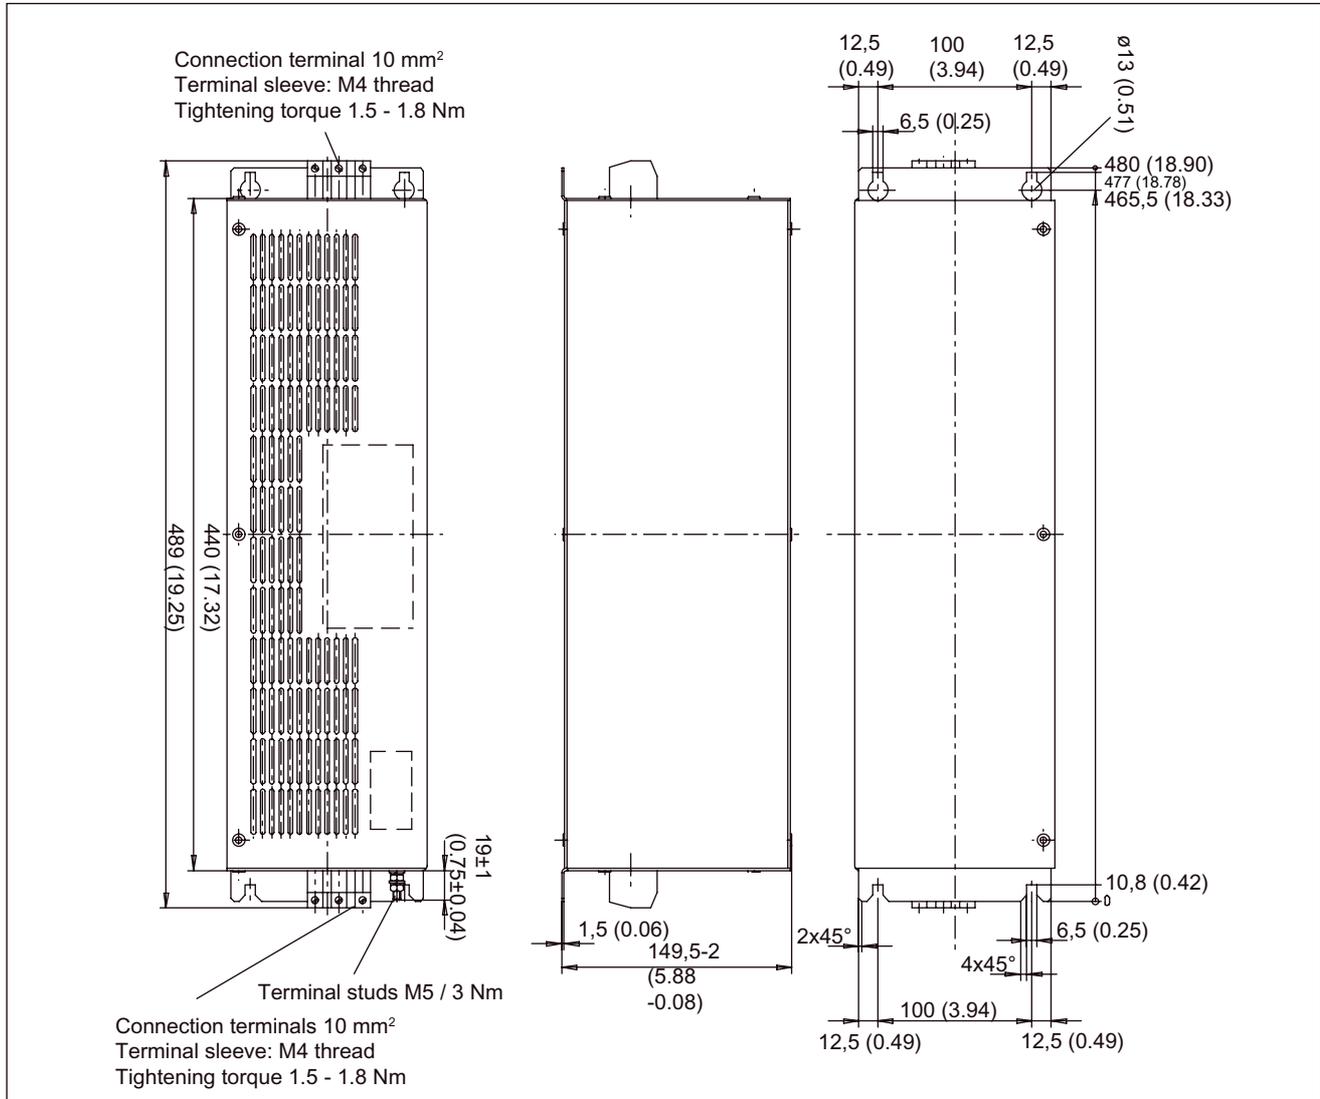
Dimension drawing of Wideband Line Filter 16 kW for Active Lines Modules, all dimensions in mm and (inches)
